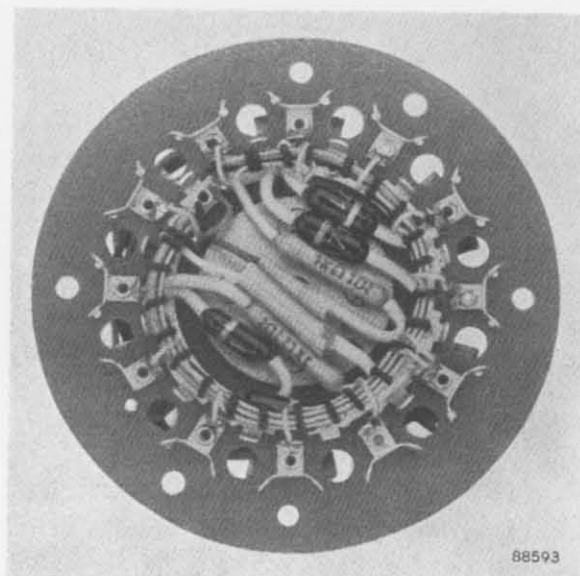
Top view of keyset mounting plate, showing contact brackets and arrangement of wiring.
